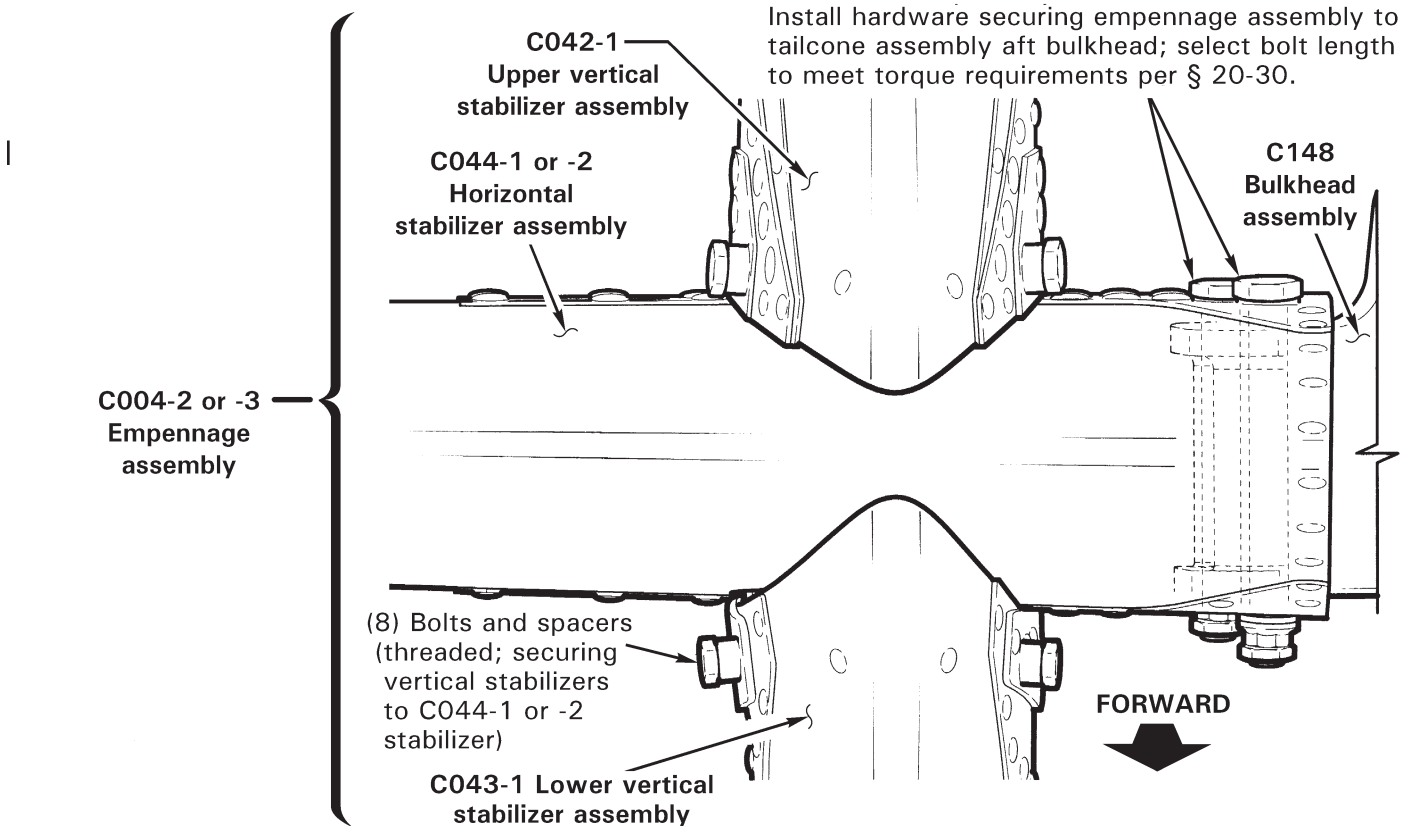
A C004-2 OR C004-3 EMPENNAGE ASSEMBLY – TAILCONE ASSEMBLY AFT BULKHEAD
